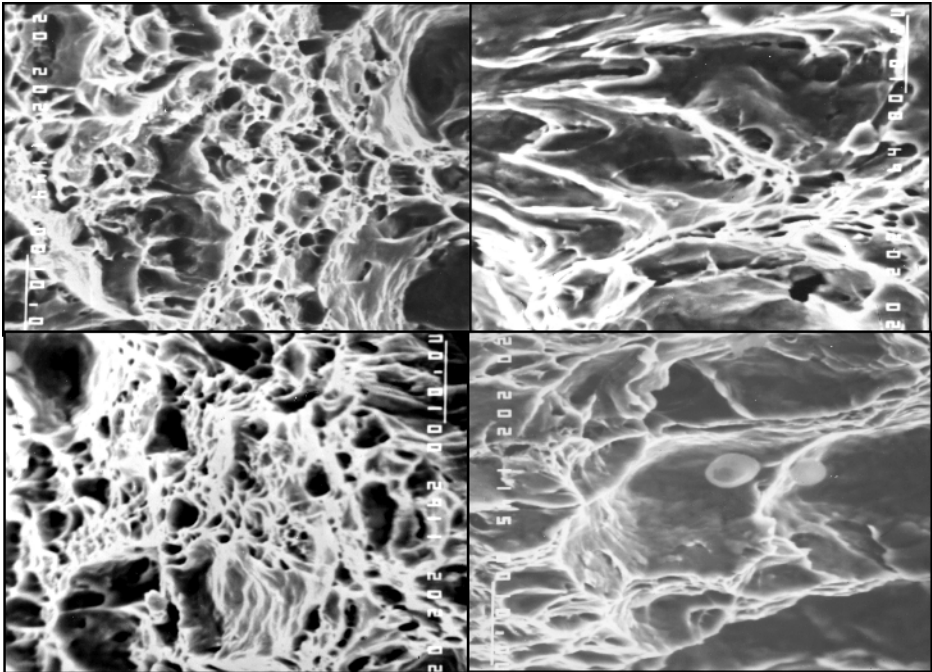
Fractured surface morphology of 09Γ2C pipe specimens tested by three-point impact bending: (a) as received; (b) after 15 years under internal static pressure.
